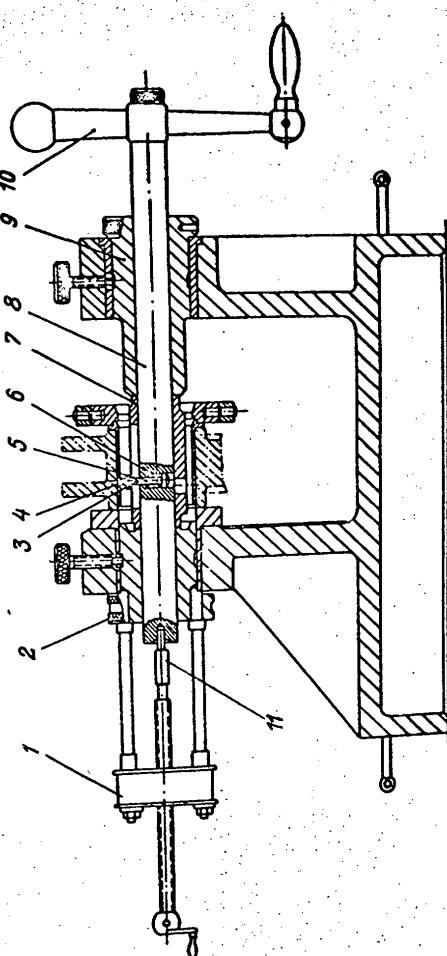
BORING MASTER ROD CRANKPIN END BUSHING
